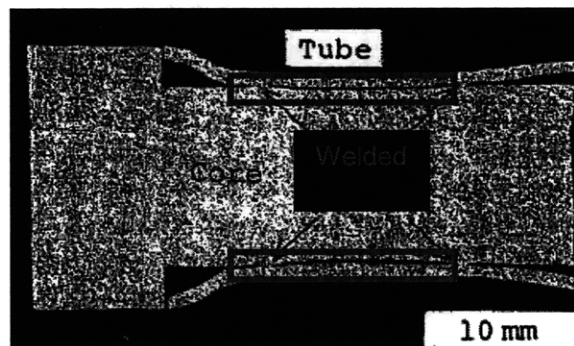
Example of the actual welded length (red box), from which the welded length ratio is calculated [18].
